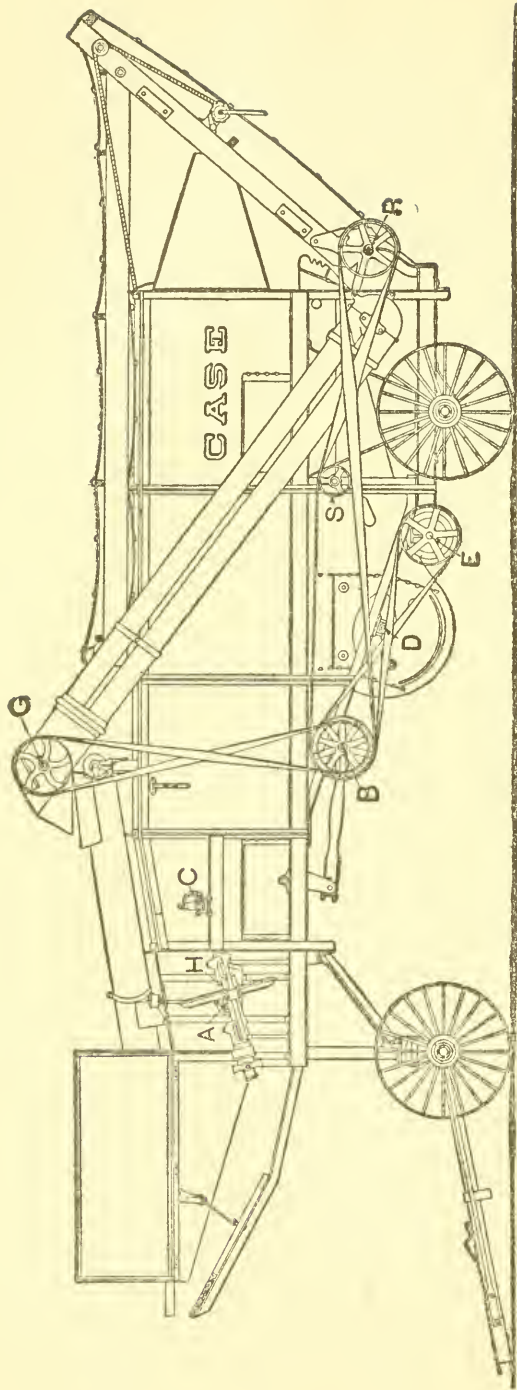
RIGHT SIDE OF GEARED SEPARATOR WITH COMMON STACKER.
